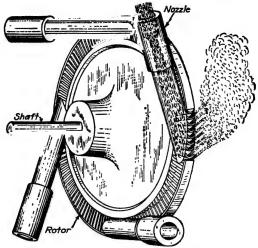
Showing nozzles and rotor of a De Laval impulse turbine.
